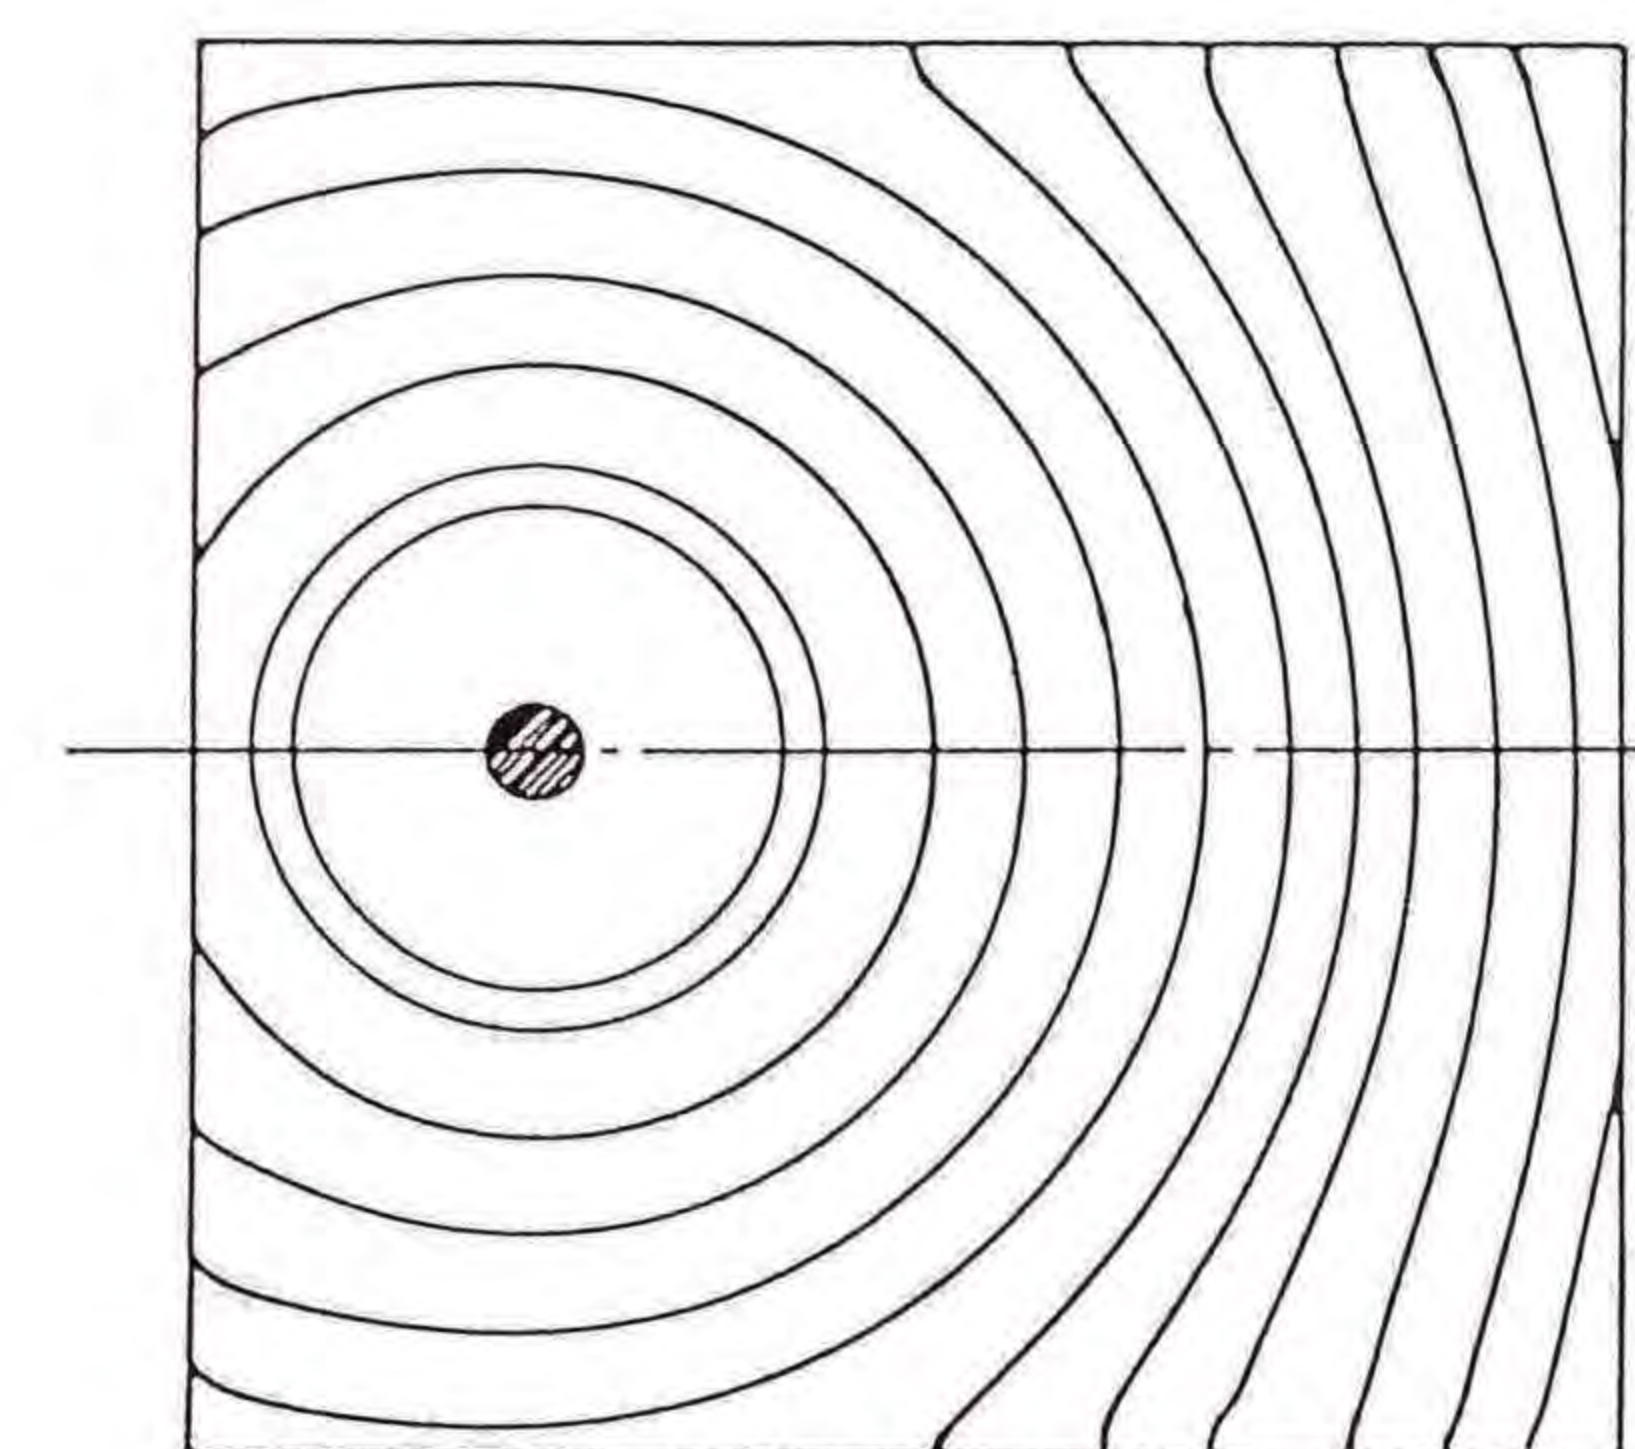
Filling-up process by short shot molding. (Square plate ; Eccentric distance = 25 mm)
